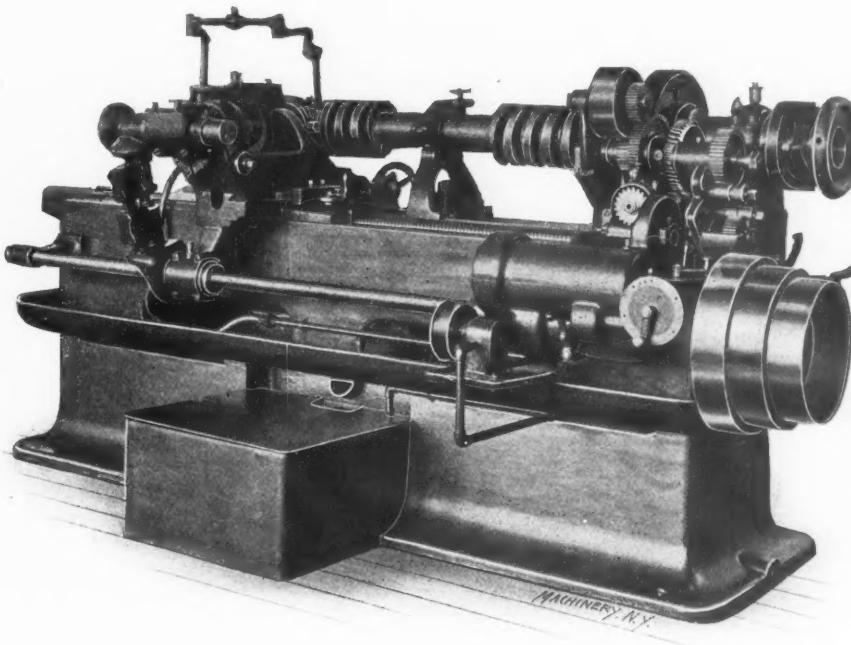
The Pratt & Whitney Thread Milling Machine, engaged in Cutting a Worm.
